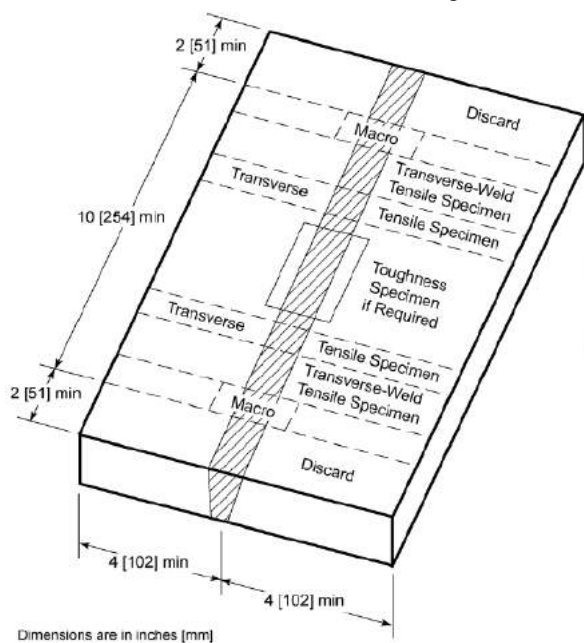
Location of Square Groove Weld Test Specimens—Plate [3]
